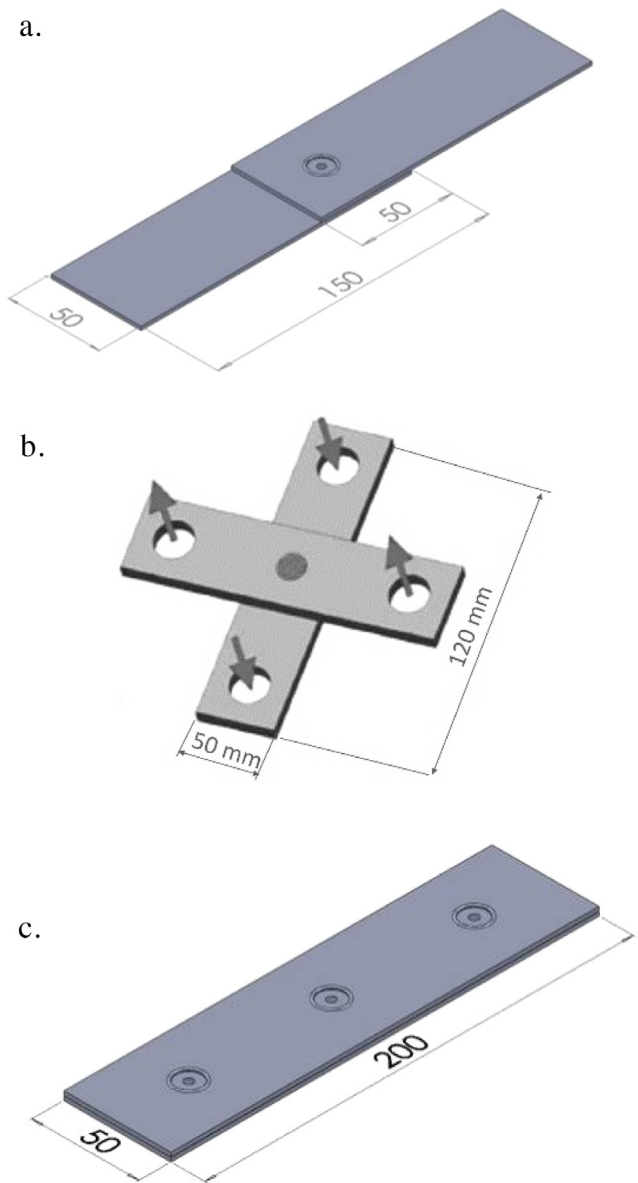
Friction Stir Spot welding samples: (a) P sample, (b) C sample and (c) M sample.
